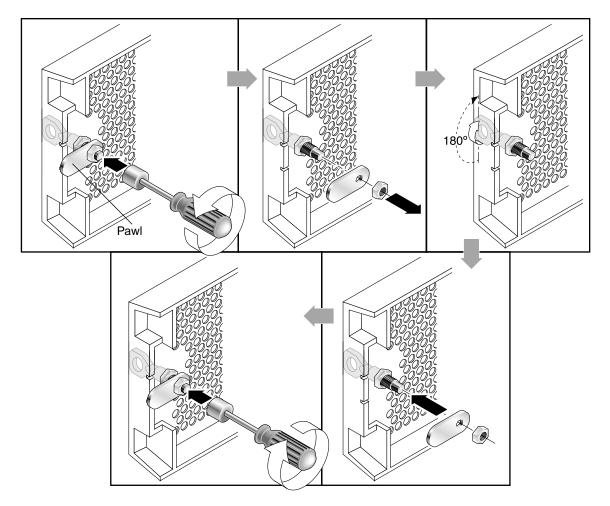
Sequence of Steps to Change Front Bezel Locks So Keys Cannot Be Removed
